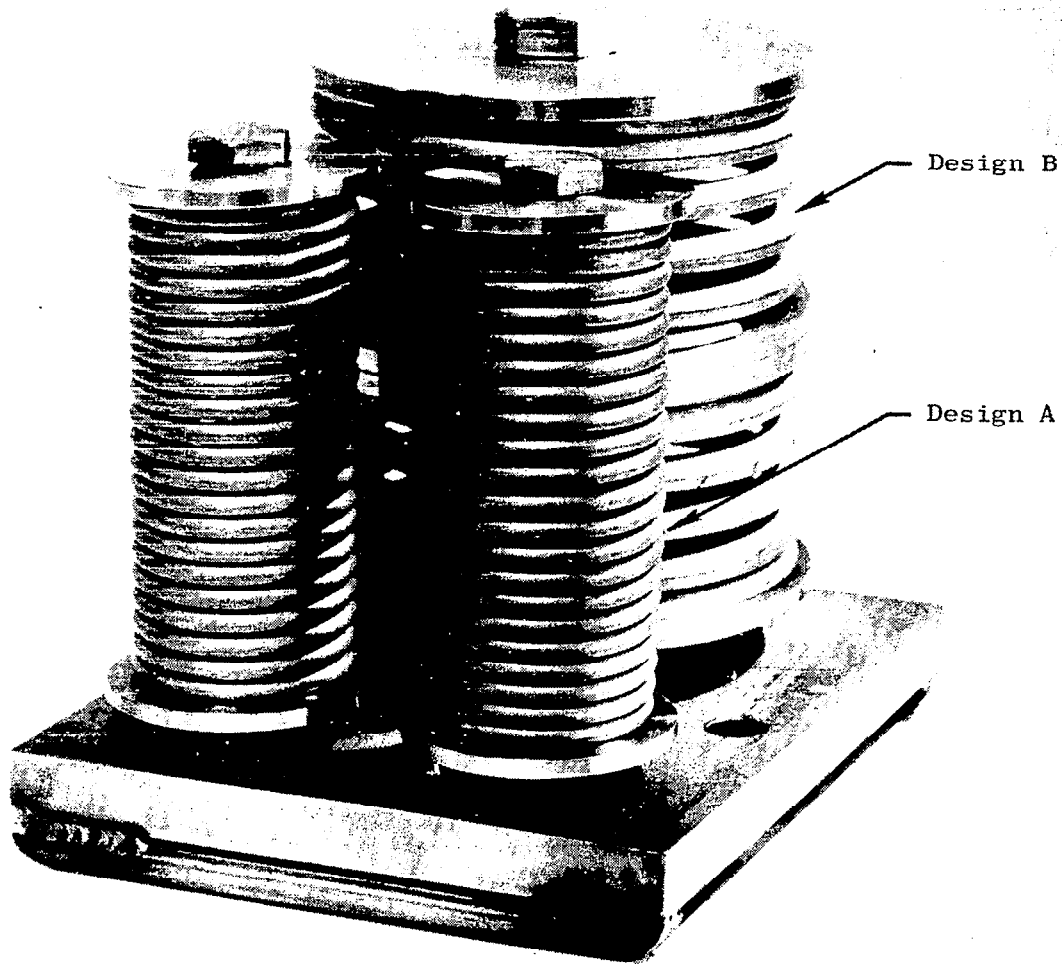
Sample High Temperature Springs Mounted on Test Fixture for Placement in Oven for Endurance Test.
